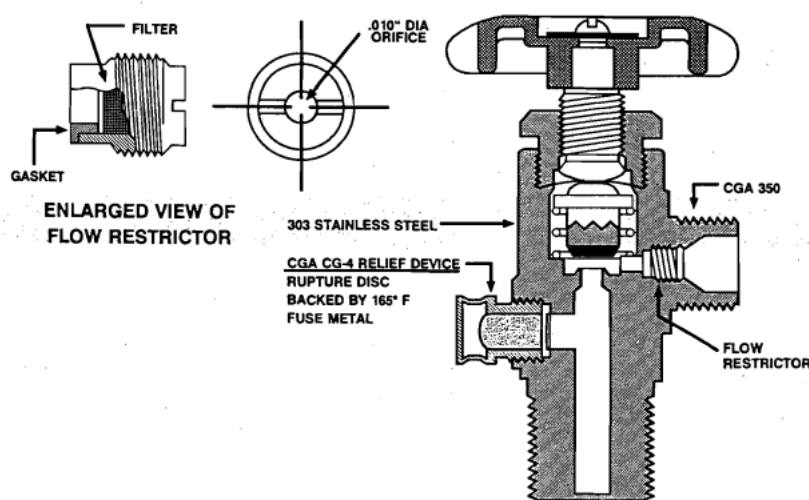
Superior Valve 303 Stainless Steel Valve^{4,5}
